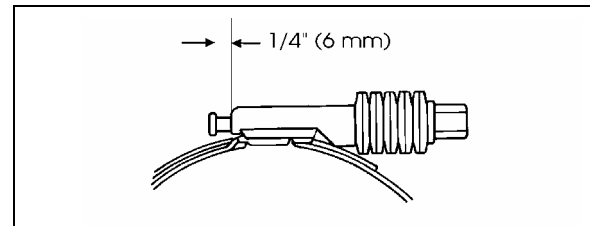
CONSTANT-TORQUE CLAMP 05037
